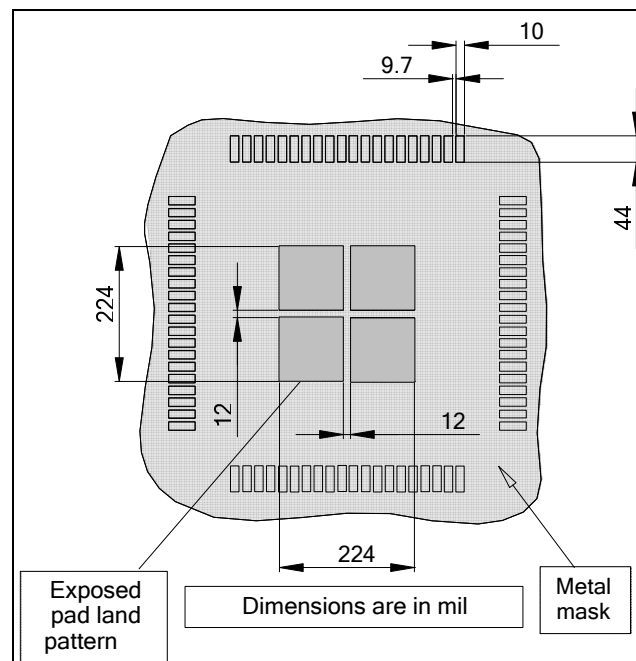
Recommended Solder Printing Paste Mask Apertures (CS)
